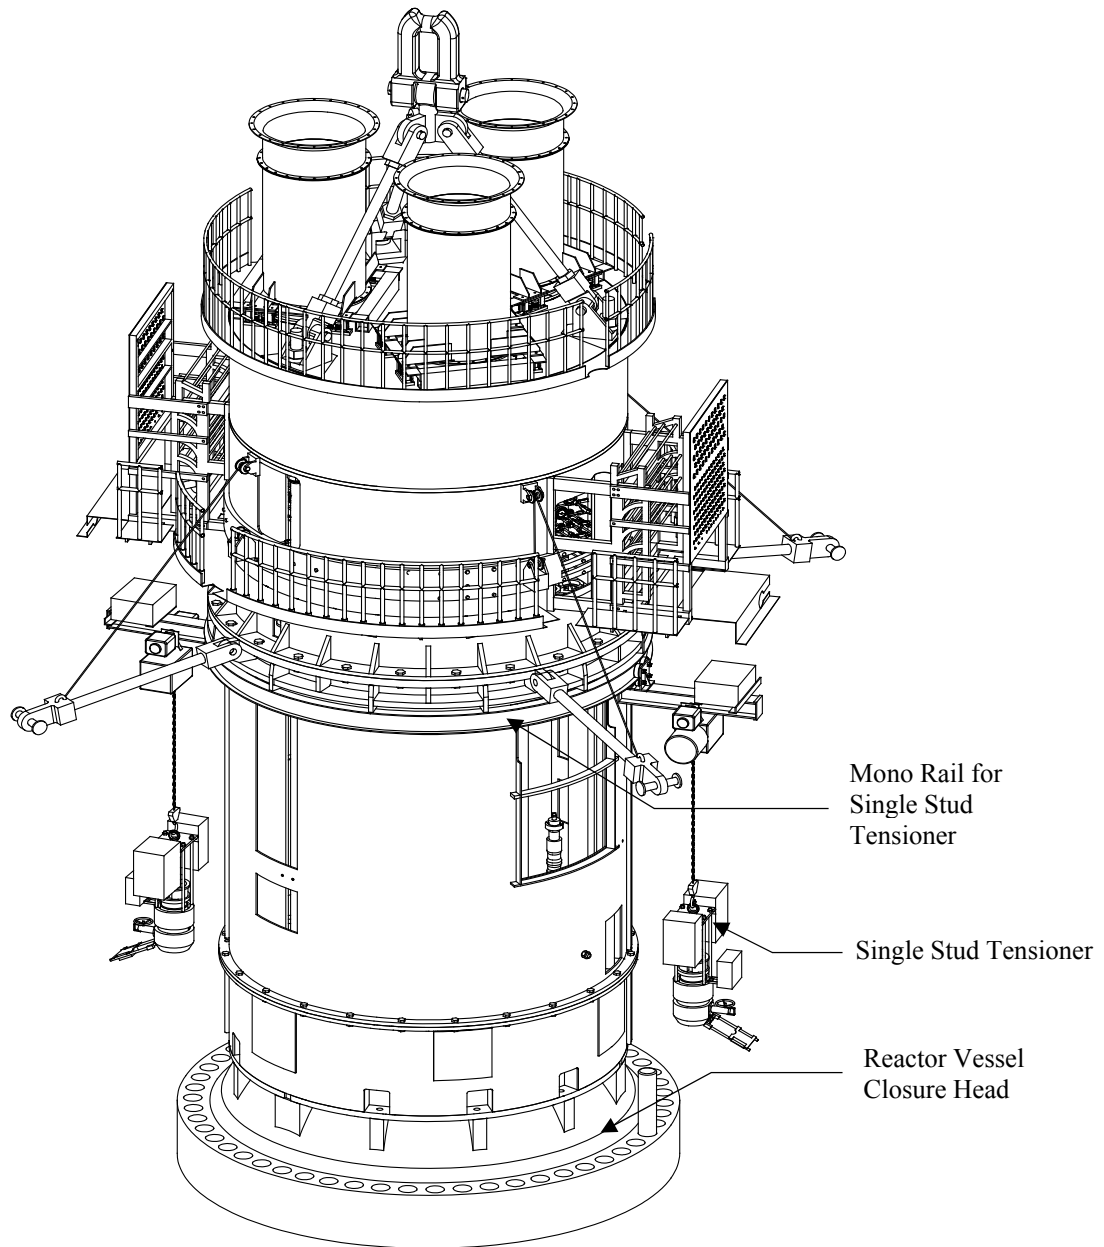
Single Stud Tensioner in the Integrated Head Assembly
